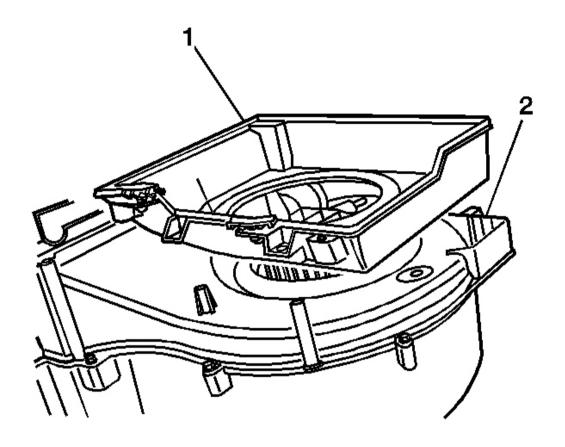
Lower Recirulation Housing Courtesy of GENERAL MOTORS CORP.
